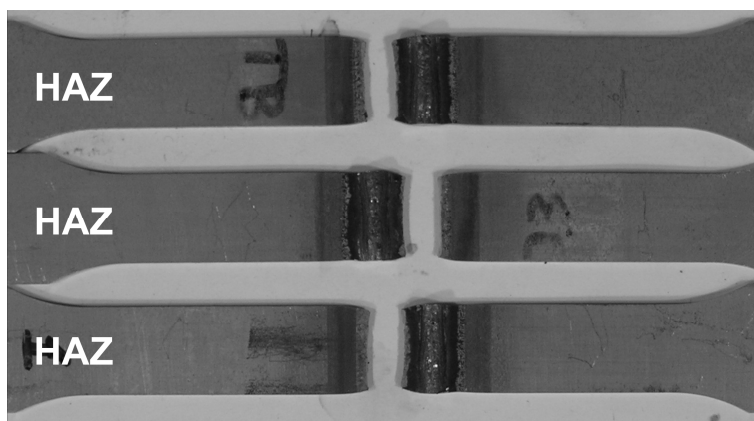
The low heat input (TB123) weld tensile specimens from the 1.20 mm DP980 '23s' sheet steel are shown after they were loaded to fracture. The weld was observed to have 100% HAZ failure.
